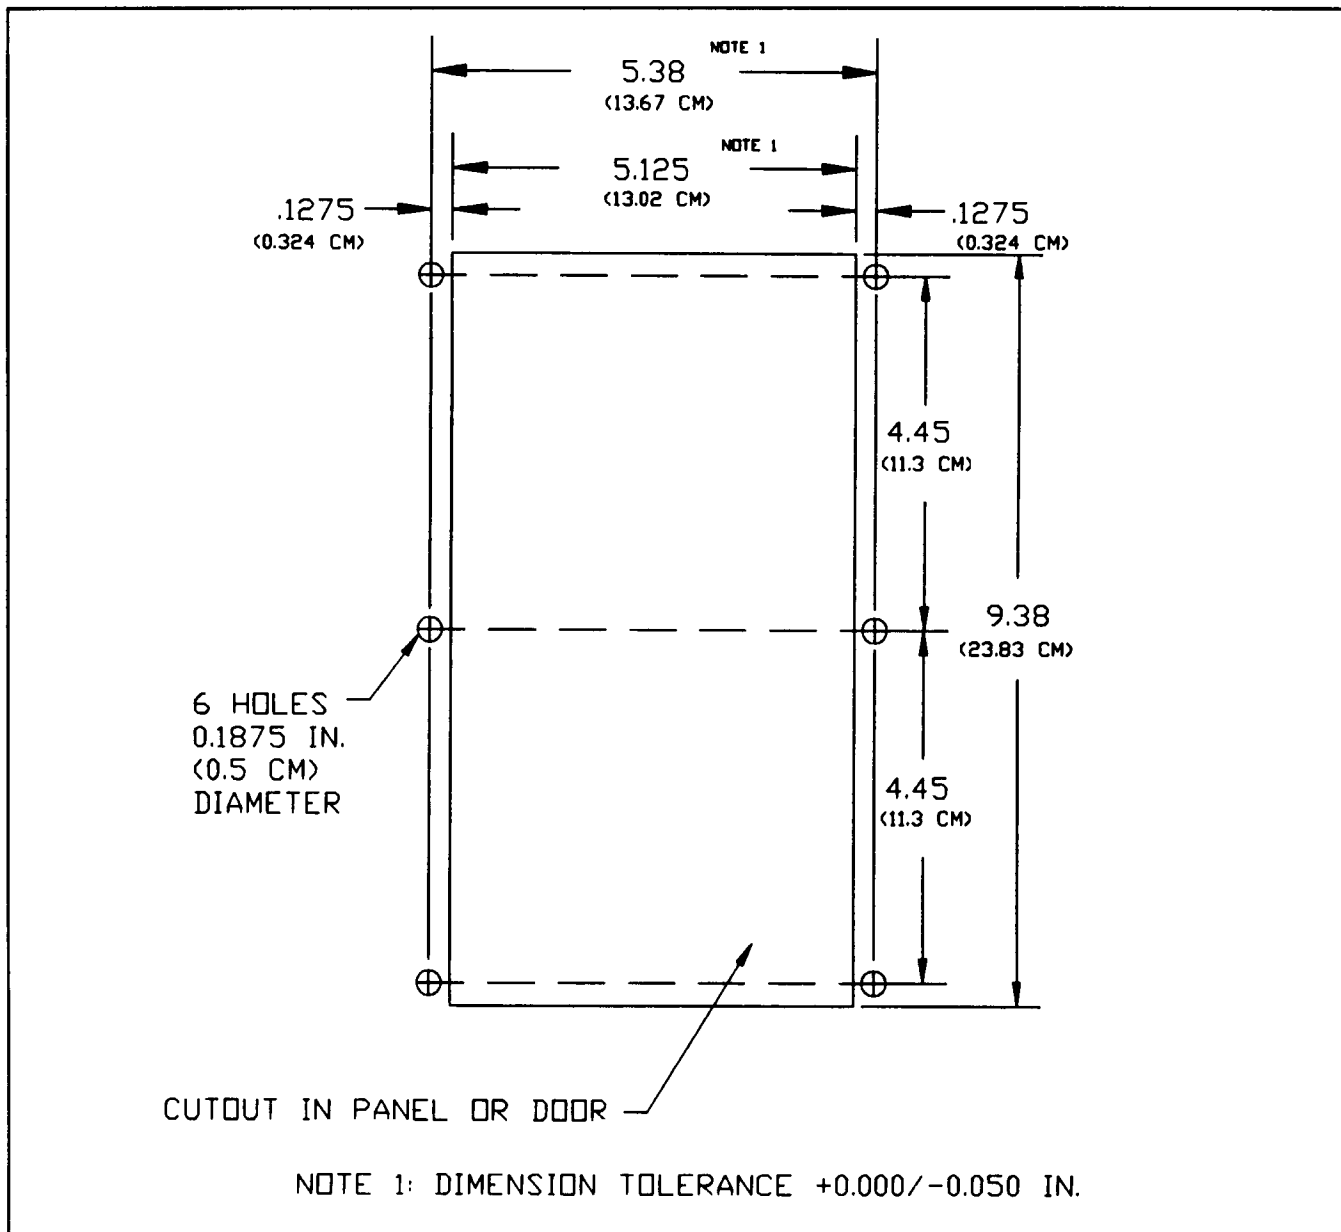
IQ-1000 II Chassis Cutout Dimensions
